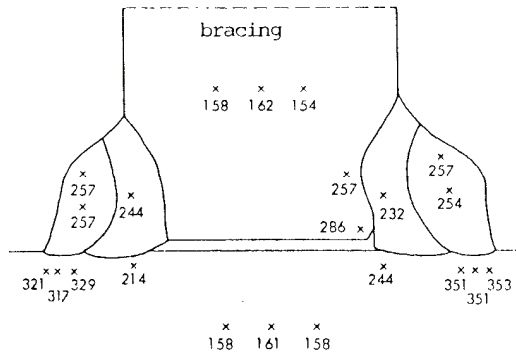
Hardness distribution in failed fillet welded joint between bracing and flange plate
